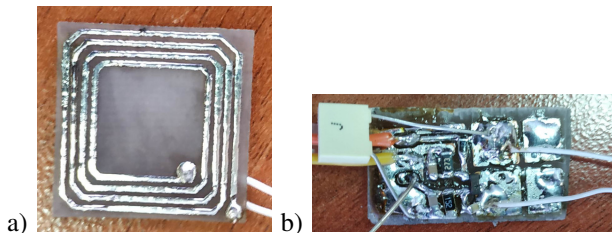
Manufactured transformer, winding is the same on top and bottom a) and manufacturer Colpitts generator circuit b)
